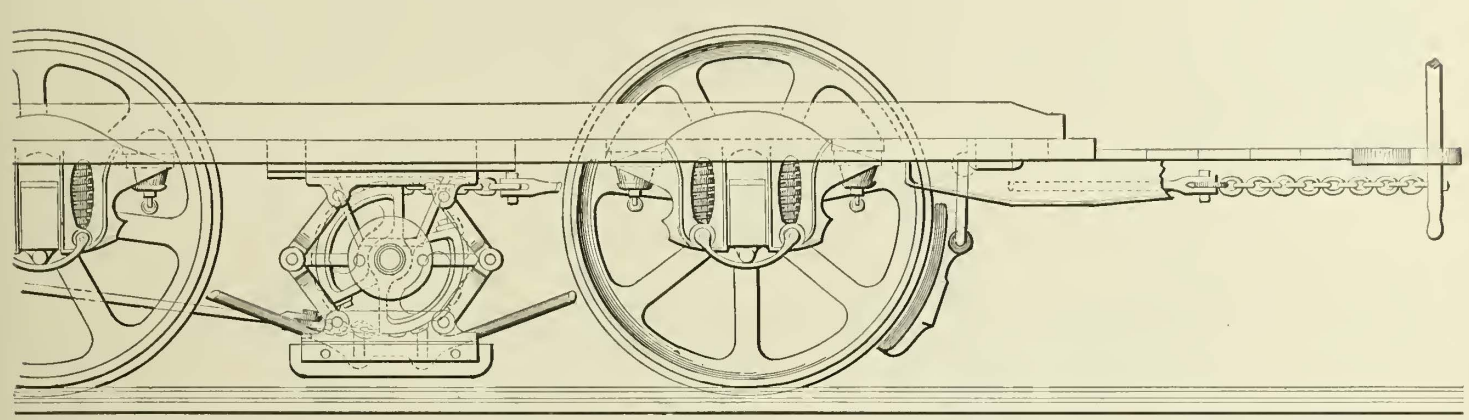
WOOD & FOWLER TRACK BRAKE FOR CABLE CARS—SIDE ELEVATION.
